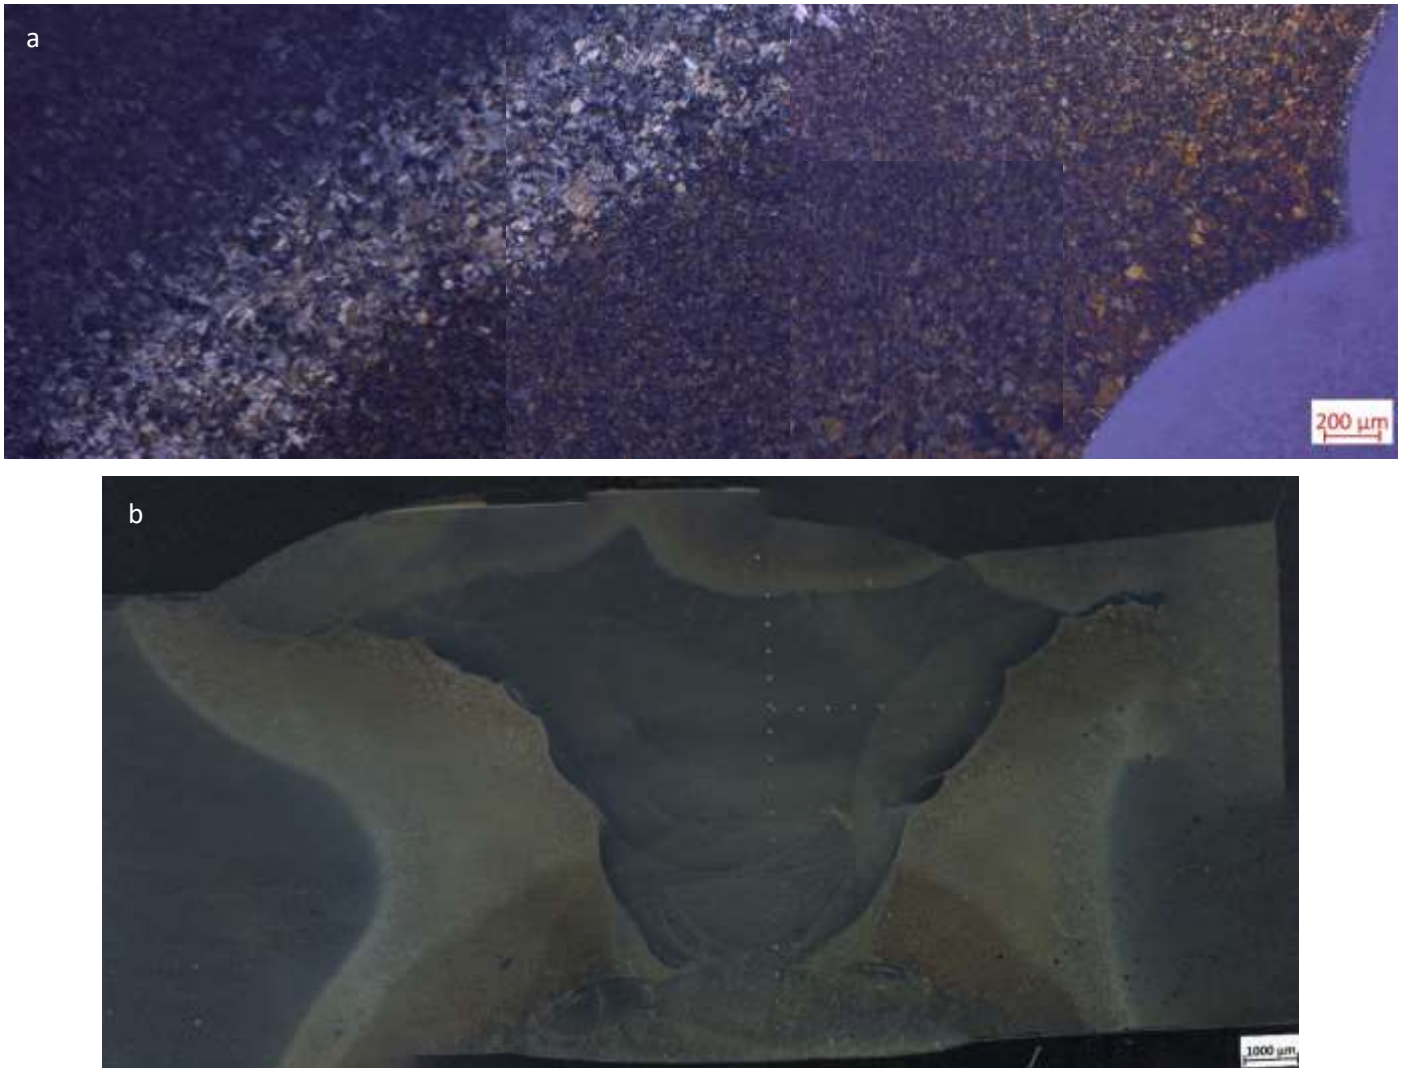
Optical microscope picture of welded sample heat affected zone (a) and weld bead section (b)
